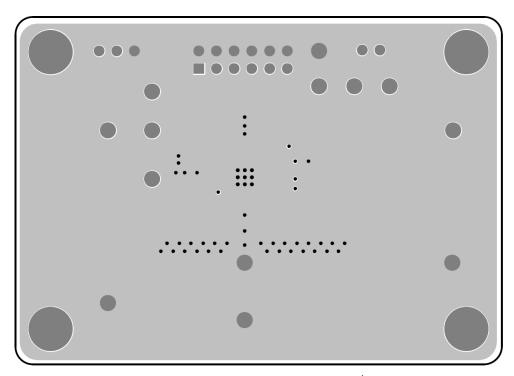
PCB Layout—Inner Side (3<sup>rd</sup> Layer)
